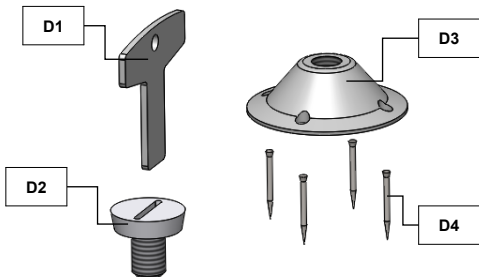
E 73 Support Part (E 73-11 - Flange)
